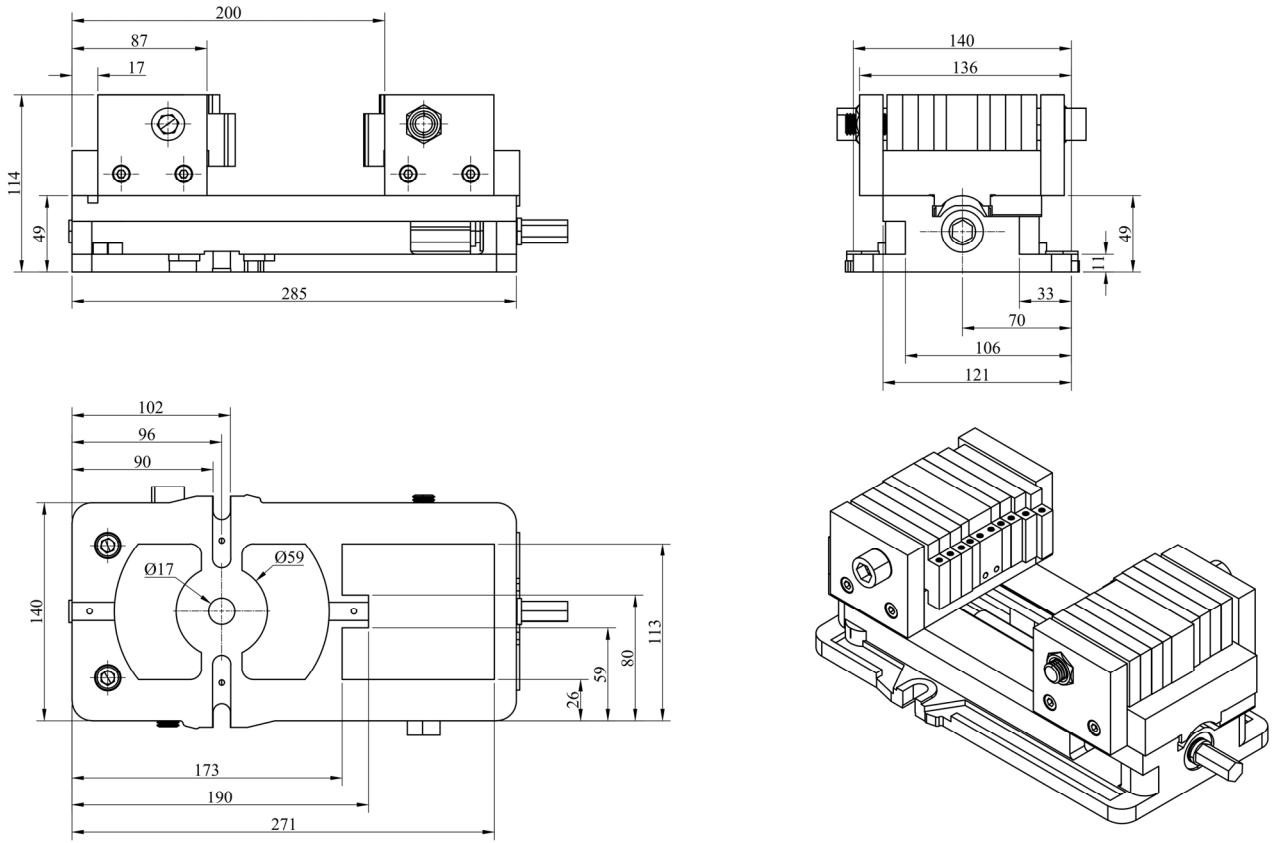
CAD drawing of the modular flexible clamping fixture.
